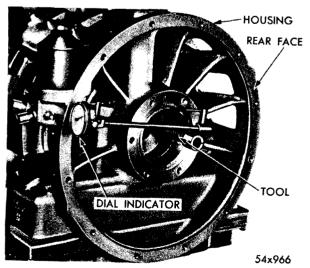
Checking Runout Rear Face Converter Housing (Tool C-870 and C-430)
